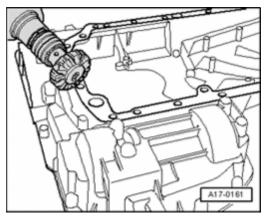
Using Rotating Plastic Brush To Remove Any Remaining Sealant From Upper Part Of Oil Pan And Cylinder Block
